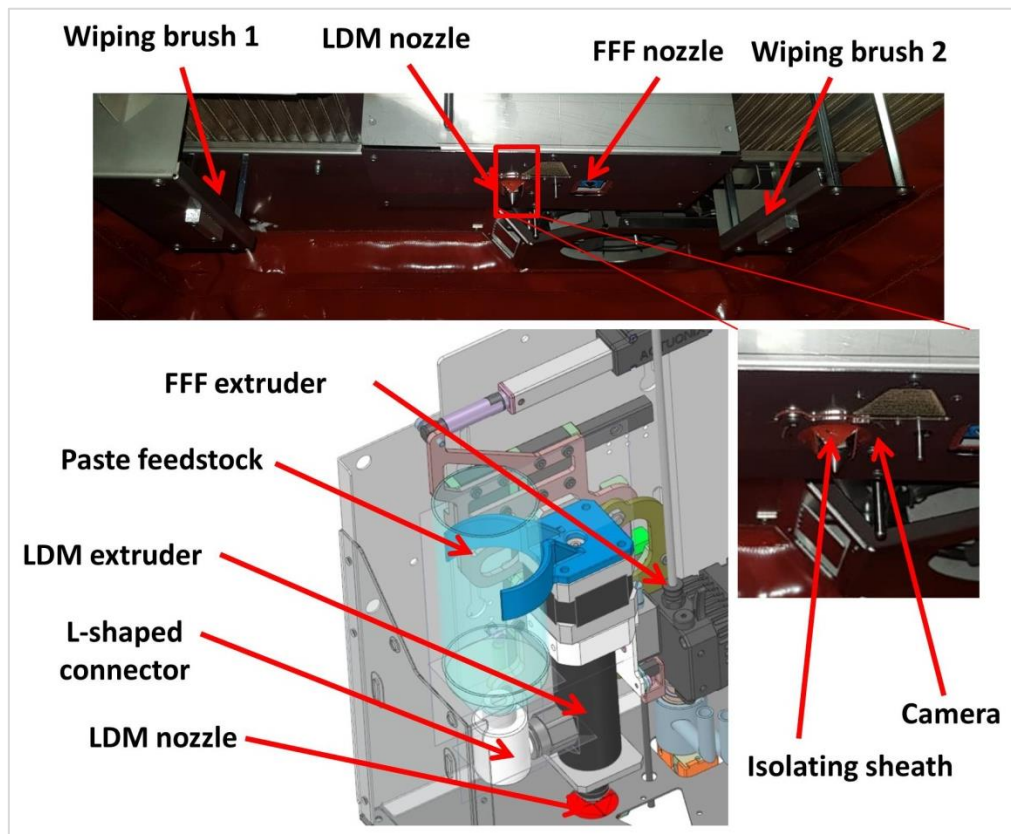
Composition of the printing unit and detailed composition of the LDM extrusion head.
